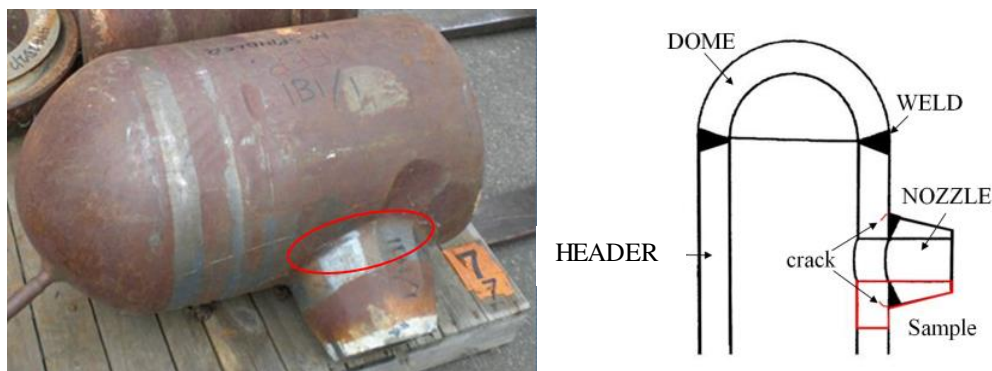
(a) Illustration and (b) schematic of the steam header, identifying the welding and cracking location
